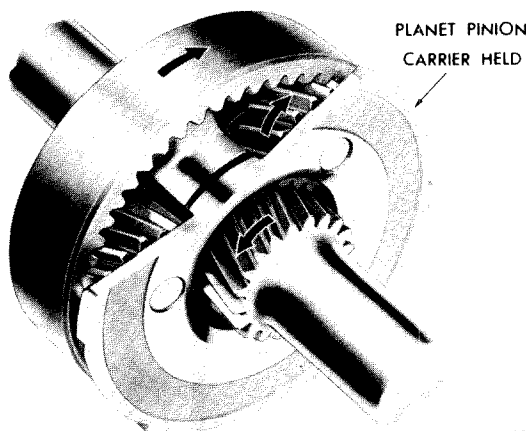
Planetary Gear Set—Reverse (Planet Pinion Carrier Held)
